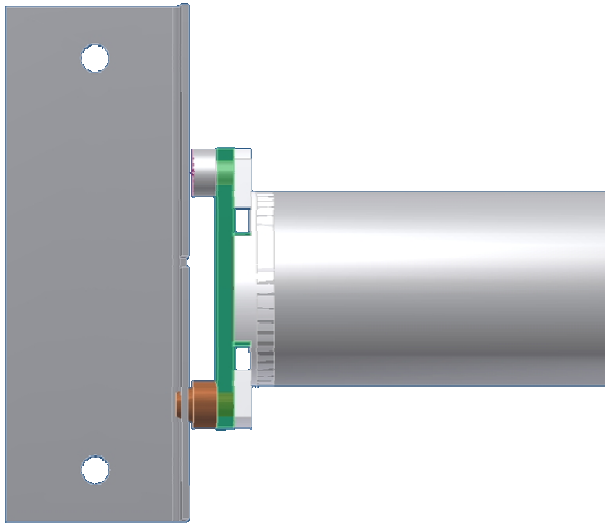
CAD Diagram of Leaf Spring Pushing against PCB
